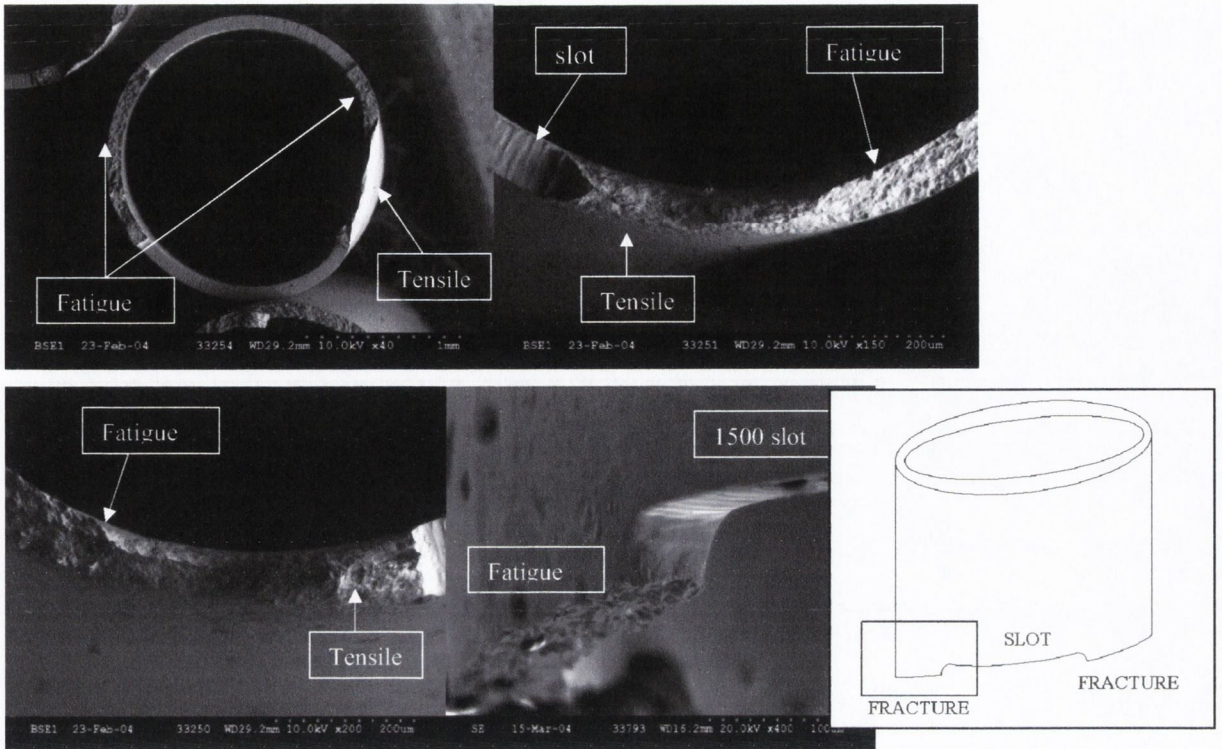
Fatigue fracture surface of a tubing specimen
